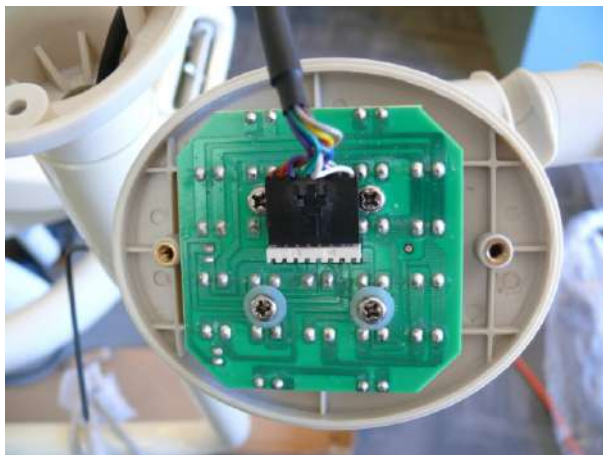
Plug the flat connector into the touchpad. Attach the touchpad with the original 2 screws.
